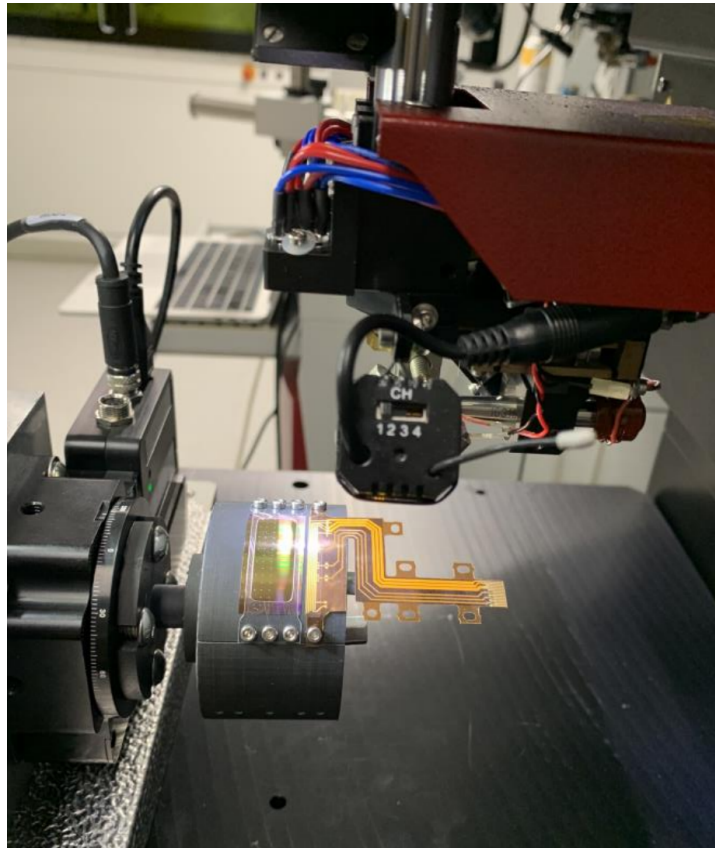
Bonding v1 and v2 ALPIDE sensors on cylindrical jigs. Taken from [78].
